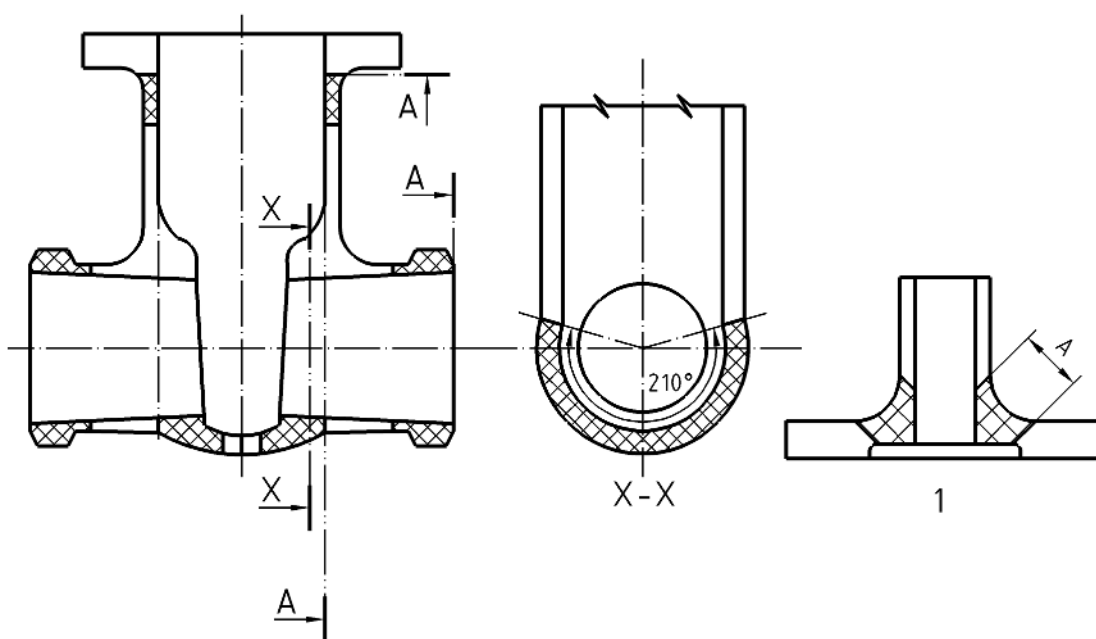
Typical casting section showing required radiographic examination of gate valve body and bonnet (flanged bonnet)
